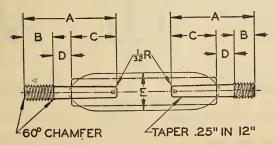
Thread plug gages, No. 8 to No. 12 sizes, inclusive
